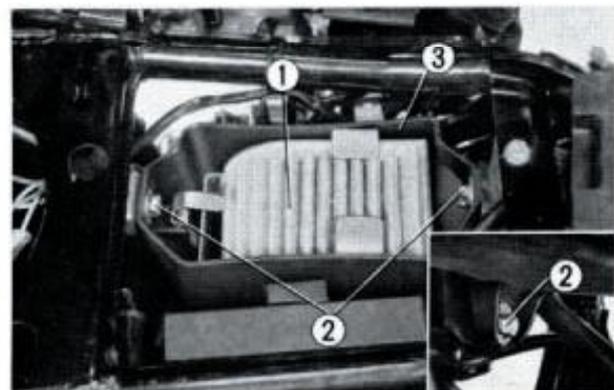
① Air cleaner element ② 6 mm bolts ③ Air cleaner case
